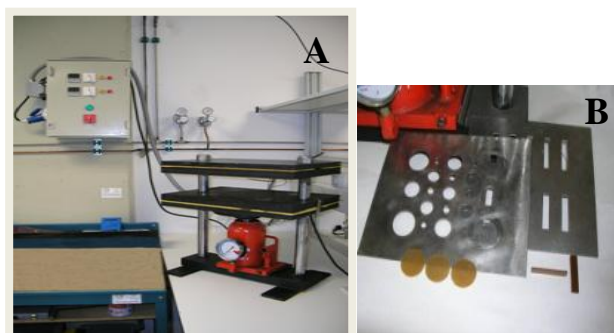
Hot-plate hydraulic press for compression-moulding (A) and moulds (B).
